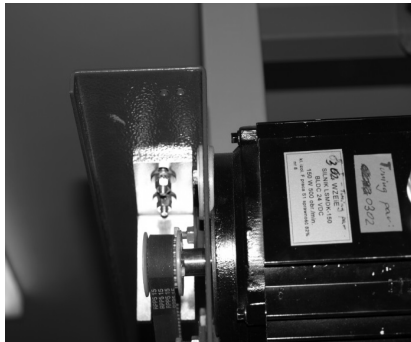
Way of mounting the motor to the main carrier without insulating pads
